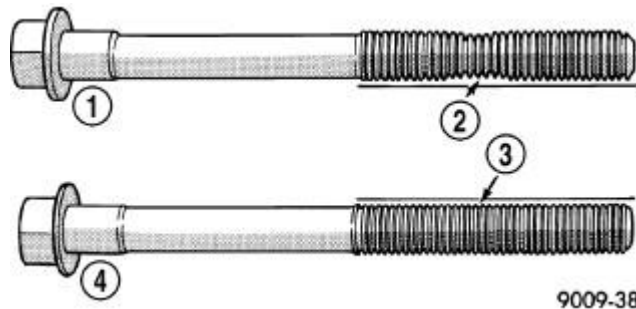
Checking Cylinder Head Bolts For Stretching (Necking)
